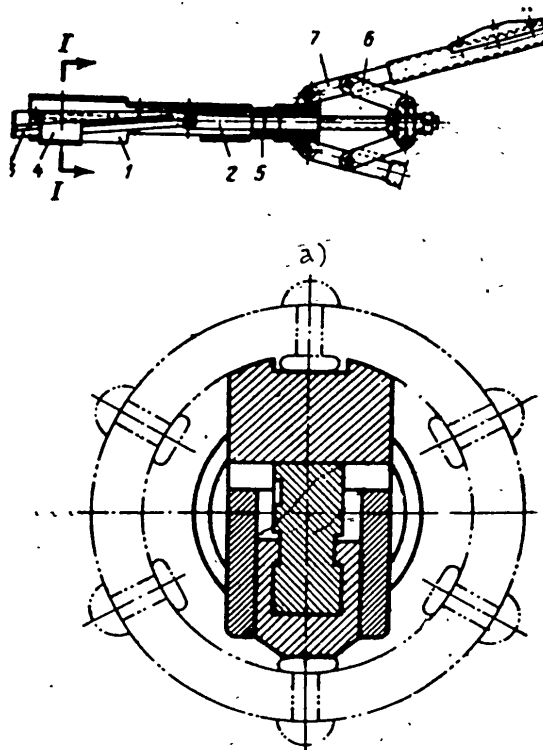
Wedge-Type Support for Press Riveting of Tubings
